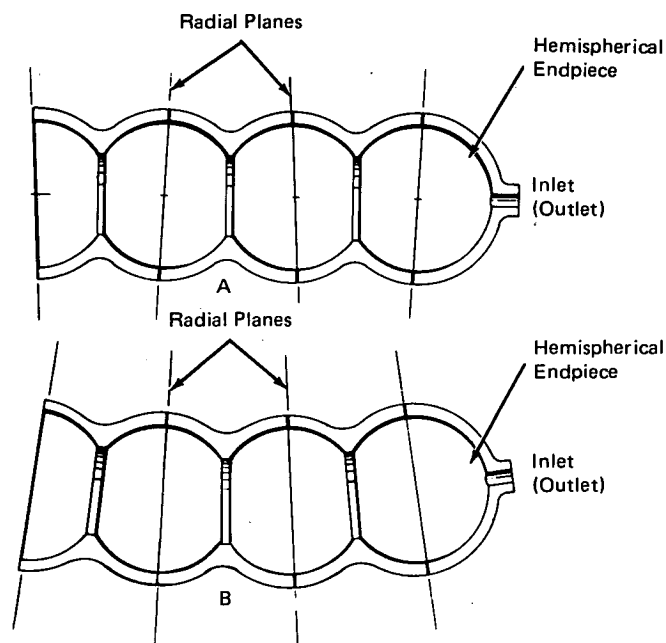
Straight-Line Assembly (A) and Circular Assembly (B)
